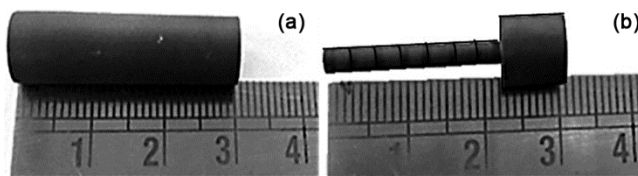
Workpiece images (a) before machining and (b) after machining.
